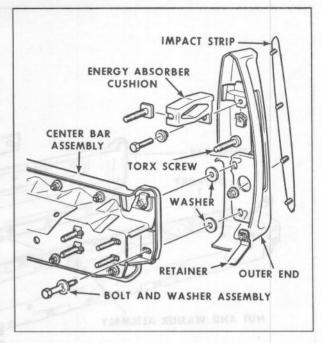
Rear Bumper Outer End-Except Eldorado
